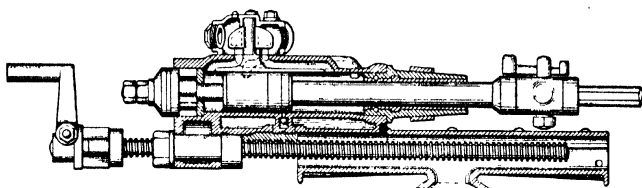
Ingersoll-Rand "Butterfly" Drill, for Tripod or Column Mounting.
